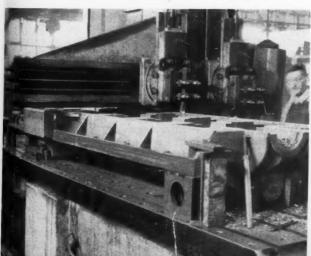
With this Cincinnati Bickford radial drilling machine the base stud holes bearing cap stud holes, and oil holes are drilled, tapped, or reamed as the case may be
